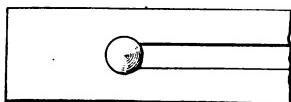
A hole drilled at the end of the cut will automatically remove the chip
